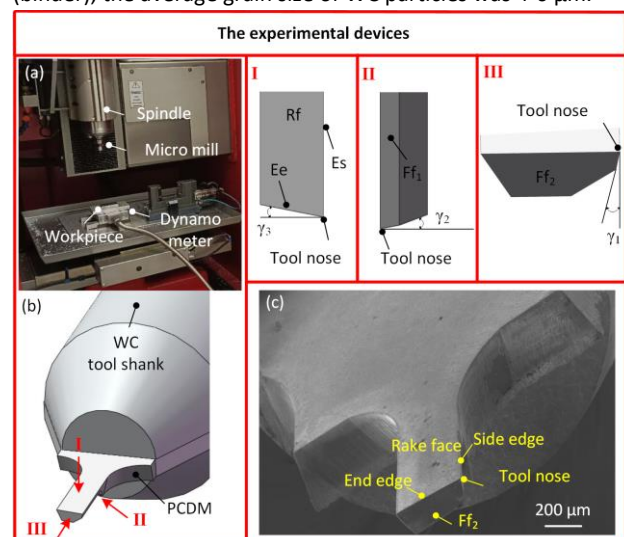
The experimental devices: a) milling machine, b) and c) self-fabricated diamond micro mill.
